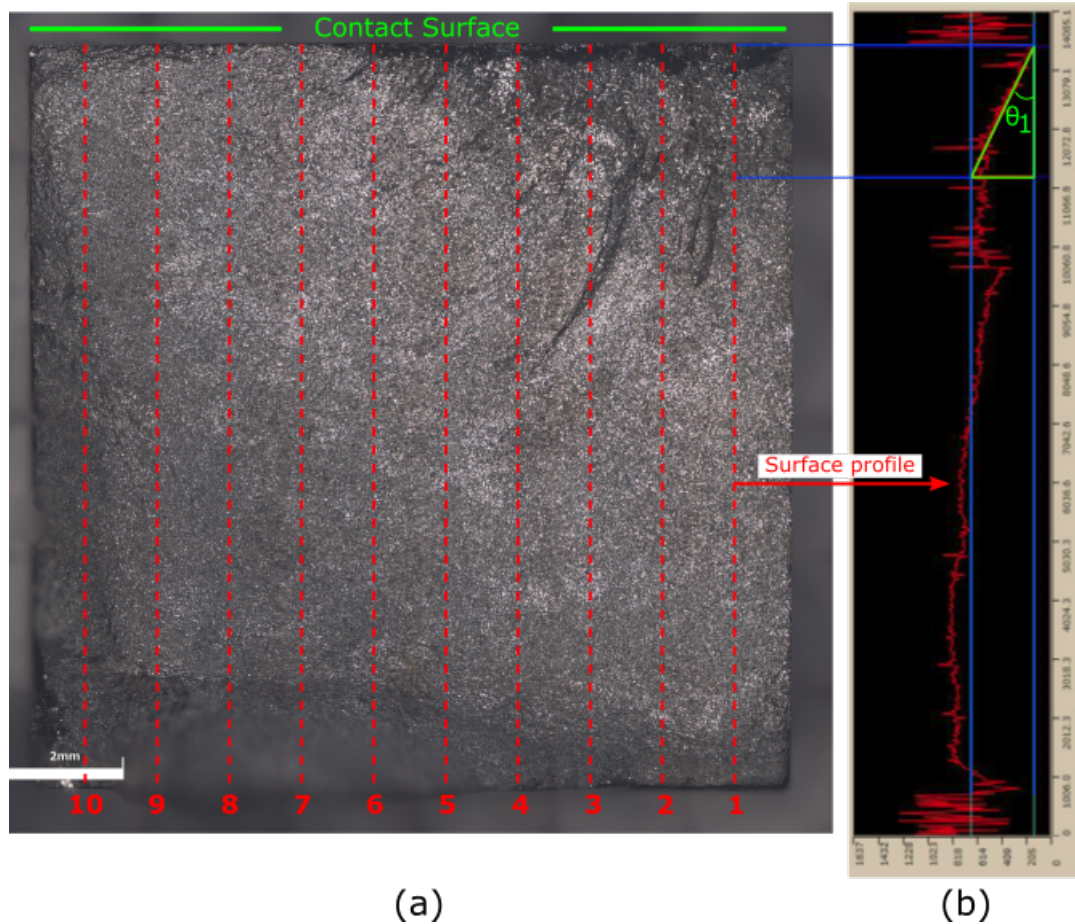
(a) Fracture surface of ff-ti-rt-pc-01 specimen, and (b) measurement of the crack initiation angle.
